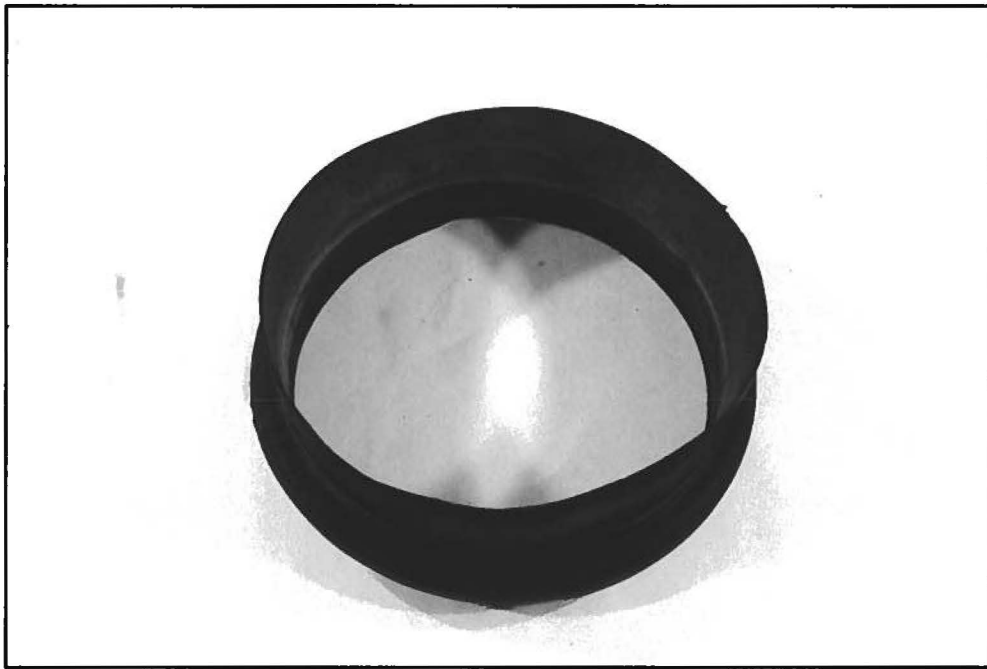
Image of the Side A gasket which was mostly intact and separated entirely from its housing upon disassembly of the coupling.
